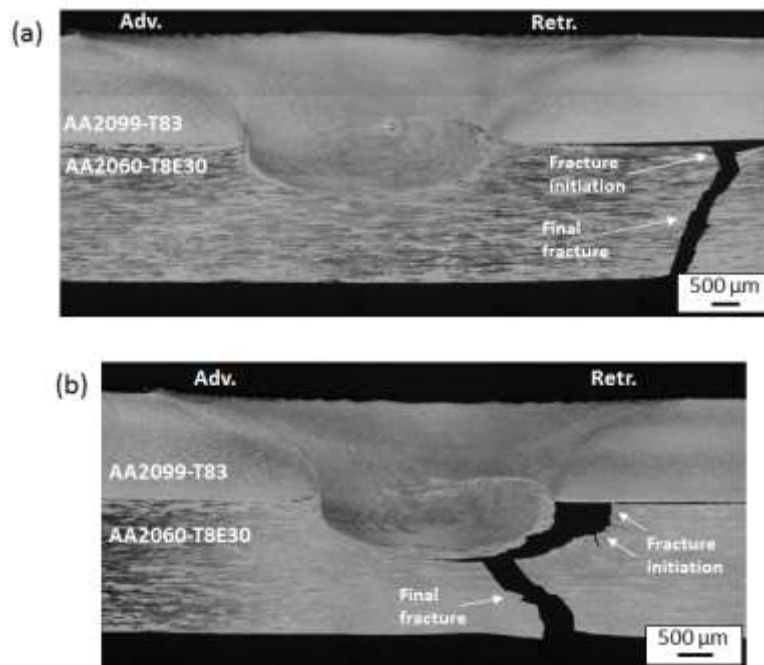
Cross-sections of FSLW joints showing different fracture modes; (a) fracture out of the FSLW joint (specimen from coupon C05 tested at a 30% of the YS); and (b) fracture at the HAZ of the FSLW joint (specimen from coupon C05 tested at a 70% of the YS).
